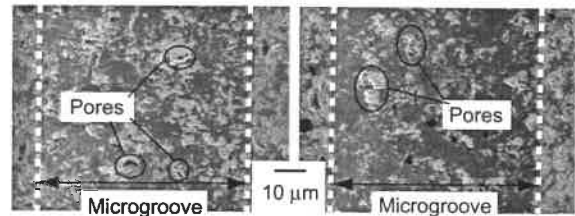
shows the machined microgrooves. Microgroove machined by each rotation speed shows good shape accuracy. However, because poreless processing of the workpiece is not executed, there are large numbers of pores in the workpiece. The cutting forces are changed by the presence or absence of pores. When the tool rotation speed is increased, the impact to the tool becomes large, and it may cause the chipping on the cutting edge.
